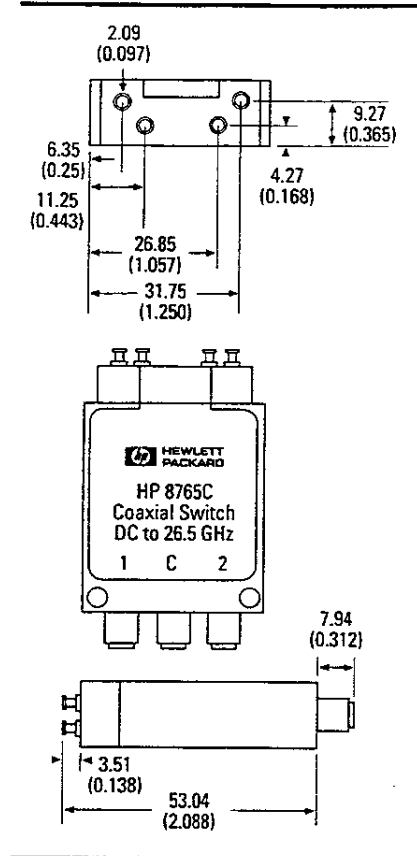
Option 100 with solder terminals part dimensions in millimeters and (inches).
